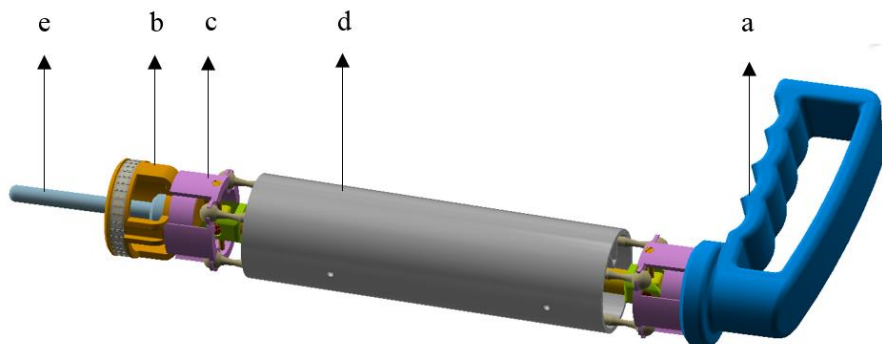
CAD of TUAC. (a) Handle, (b) Cervicovaginal cap, (c) Platform, (d) Upper and lower part of the cover, (e) Tip.
